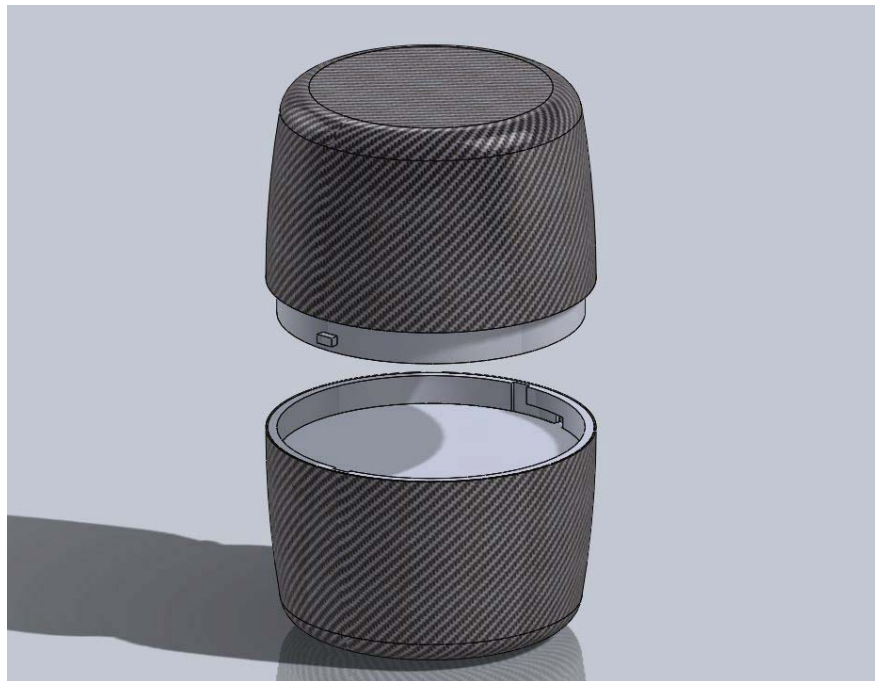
A rendering in SolidWorks was completed for the preliminary design of the ultralight bear canister.
